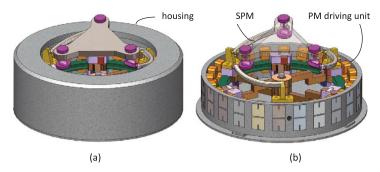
An integrated spherical motion generator combining electro-magnetic driving and a co-axial input SPM, (a) design of the SMG, (b) internal view with the housing removed [95].
